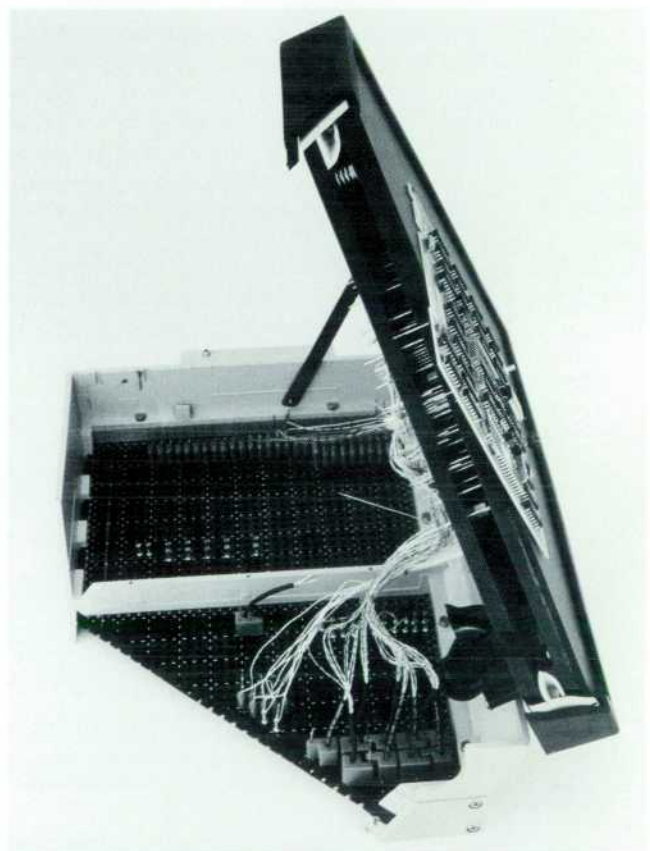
Cutaway view of test fixture. Contact to the board under test is made by using vacuum to pull the board down onto a configuration of spring-loaded pins (bed of nails). The HP 3065 tells the user how to wire these pins to the test fixture.
